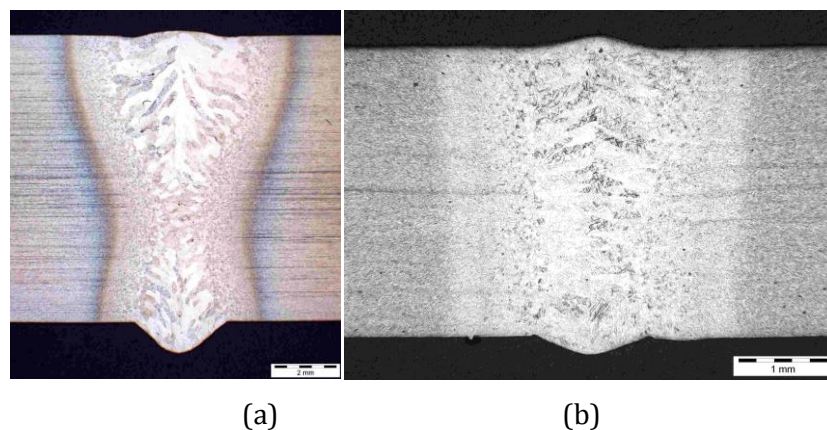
Profiles of keyhole laser welds produced in Ti-6Al-4V, (a) 9.3 mm thickness, and (b) 3.2 mm thickness. Note: different scales. Courtesy TWI Ltd.
